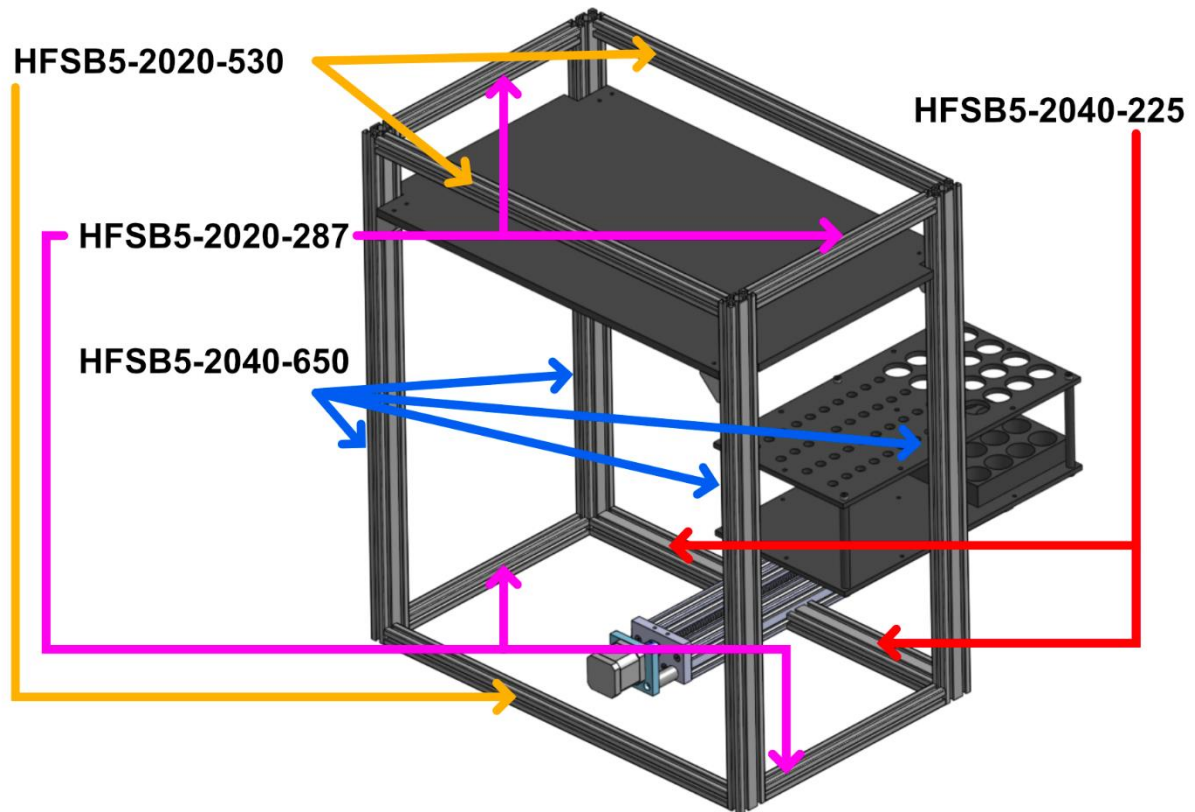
Chassis with Shelf and Tube Rack Mounted on Fraction Collector.
